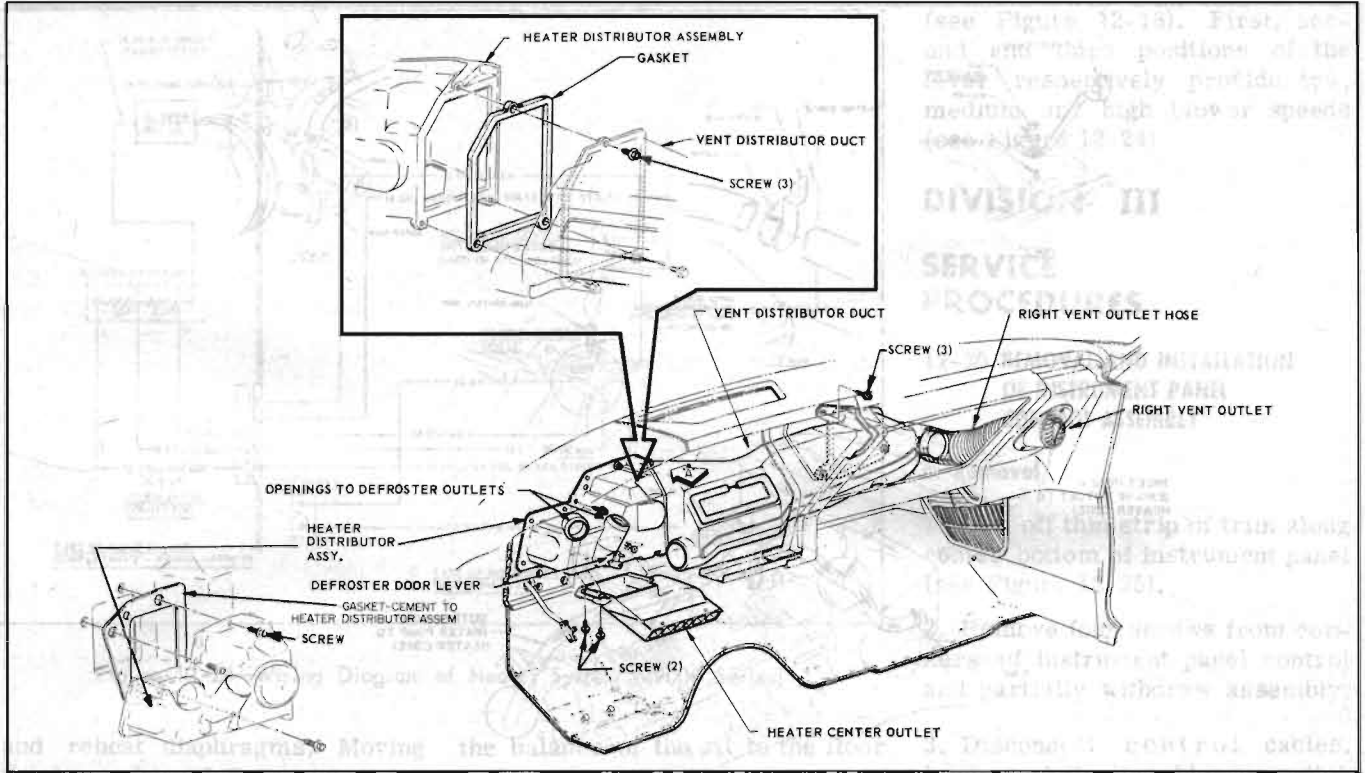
Heater Distributor Assembly Vent Distributor Duct and Center Outlet Installation (49000 Series)
